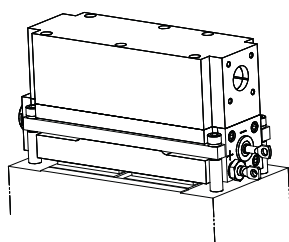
provides general instructions for installing a heat sink to the laser head, shown with a Coherent heat sink. For specific dimensions, including those of the clamping bars, see Figure 3-27 through Figure 3-30 .
